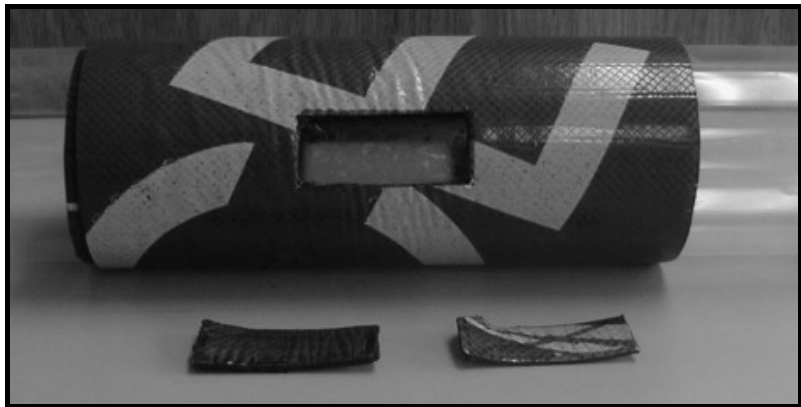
DMP-1 Material with Transducer Footprint Cut Out
